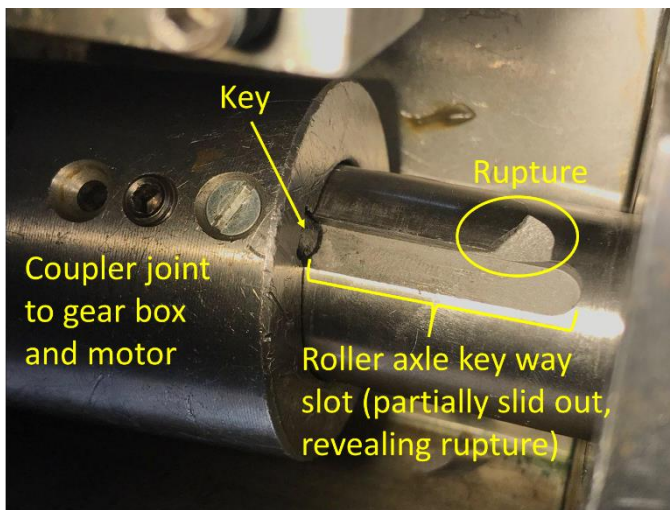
Photograph showing one of the ruptured roller axle key way slots discovered after cabling during Turkshead disassembly. The joint is partially disassembled with the coupler joint exposed to reveal the rupture next to the roller axle key way slot.
